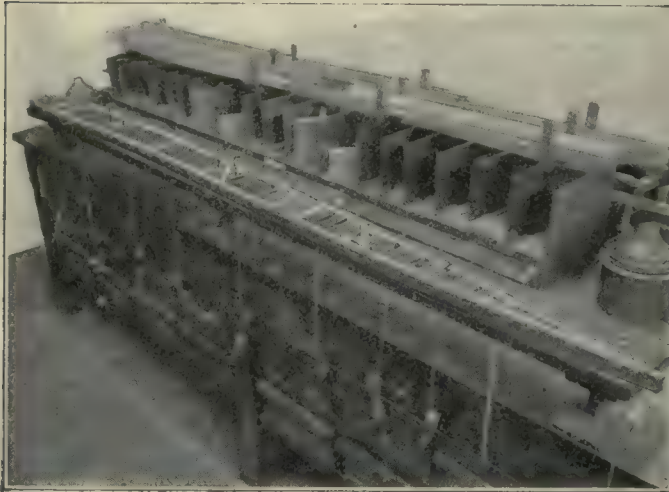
BEGINNING A WING-RIB ASSEMBLY
